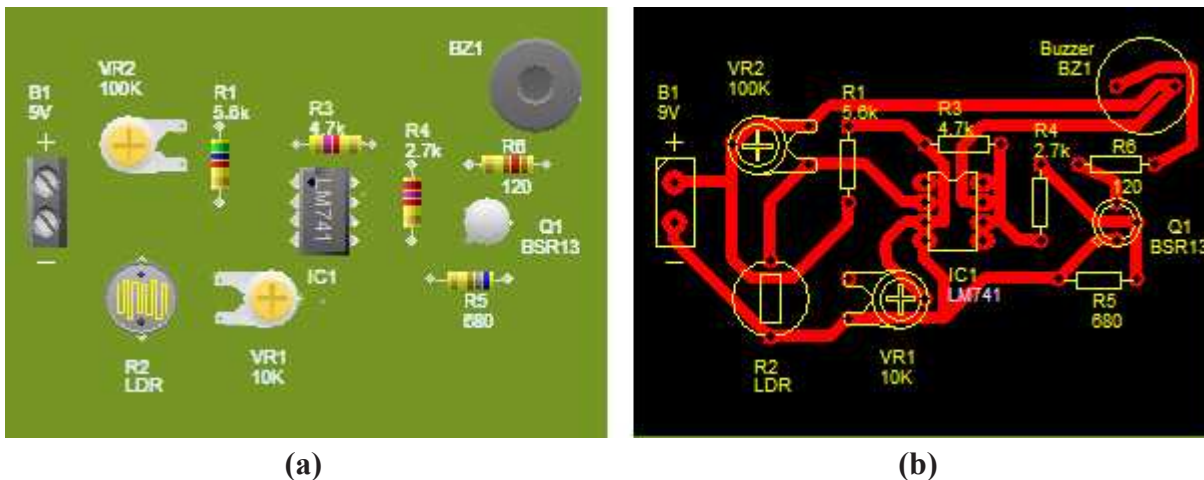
Light-level sensing with Schmitt trigger, (a) Real world circuit and (b) PCB designer artwork
